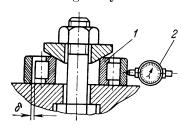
Arrangement for measuring the antifriction-bearing radial clearance
